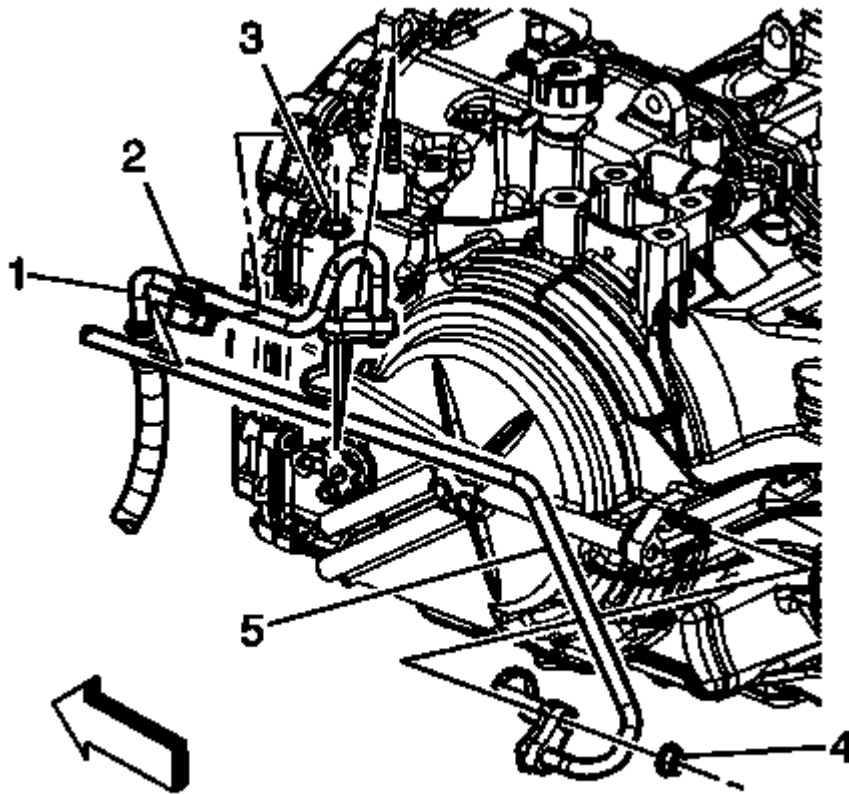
Identifying Cooler Inlet & Outlet Hoses
